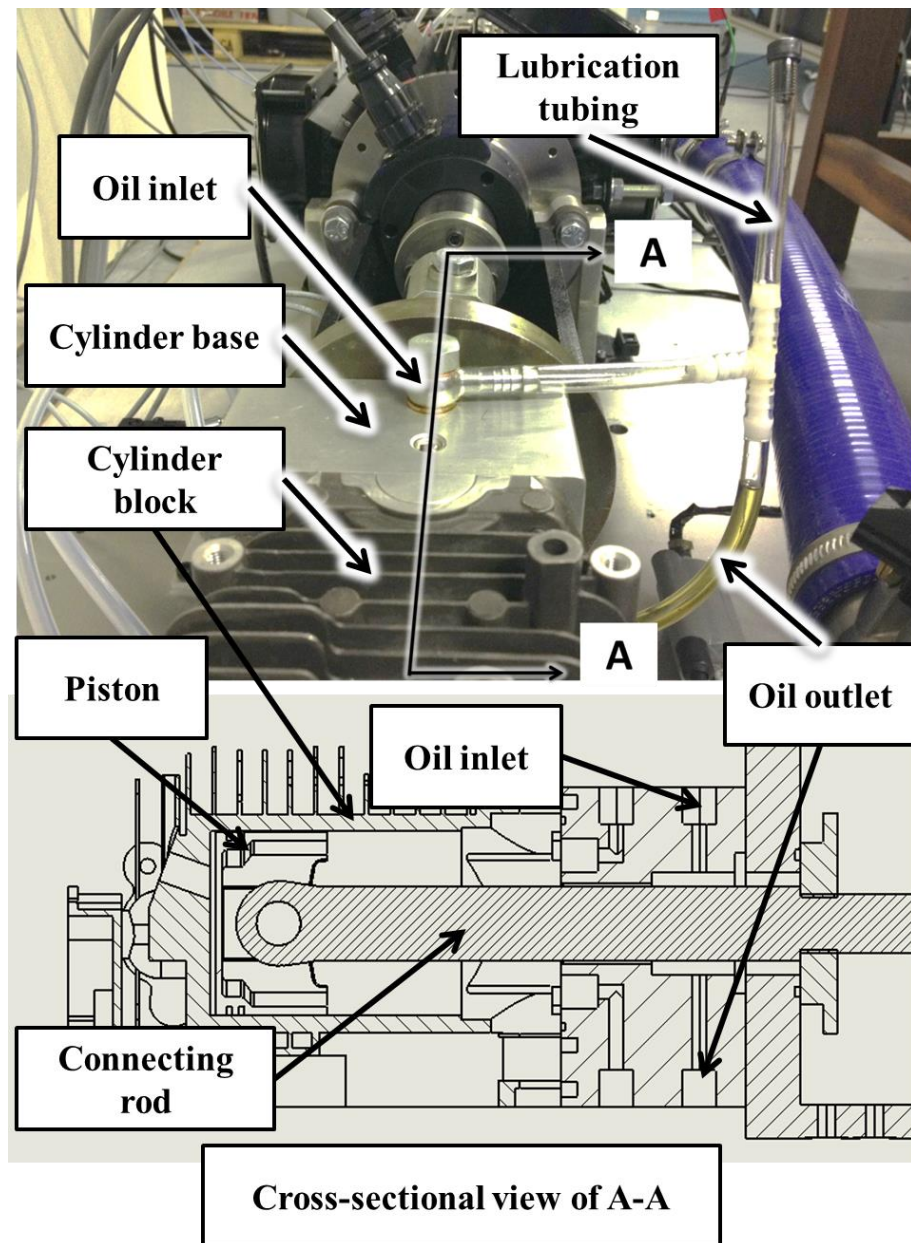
Shaft lubrication as well as additional cooling for the engine.
